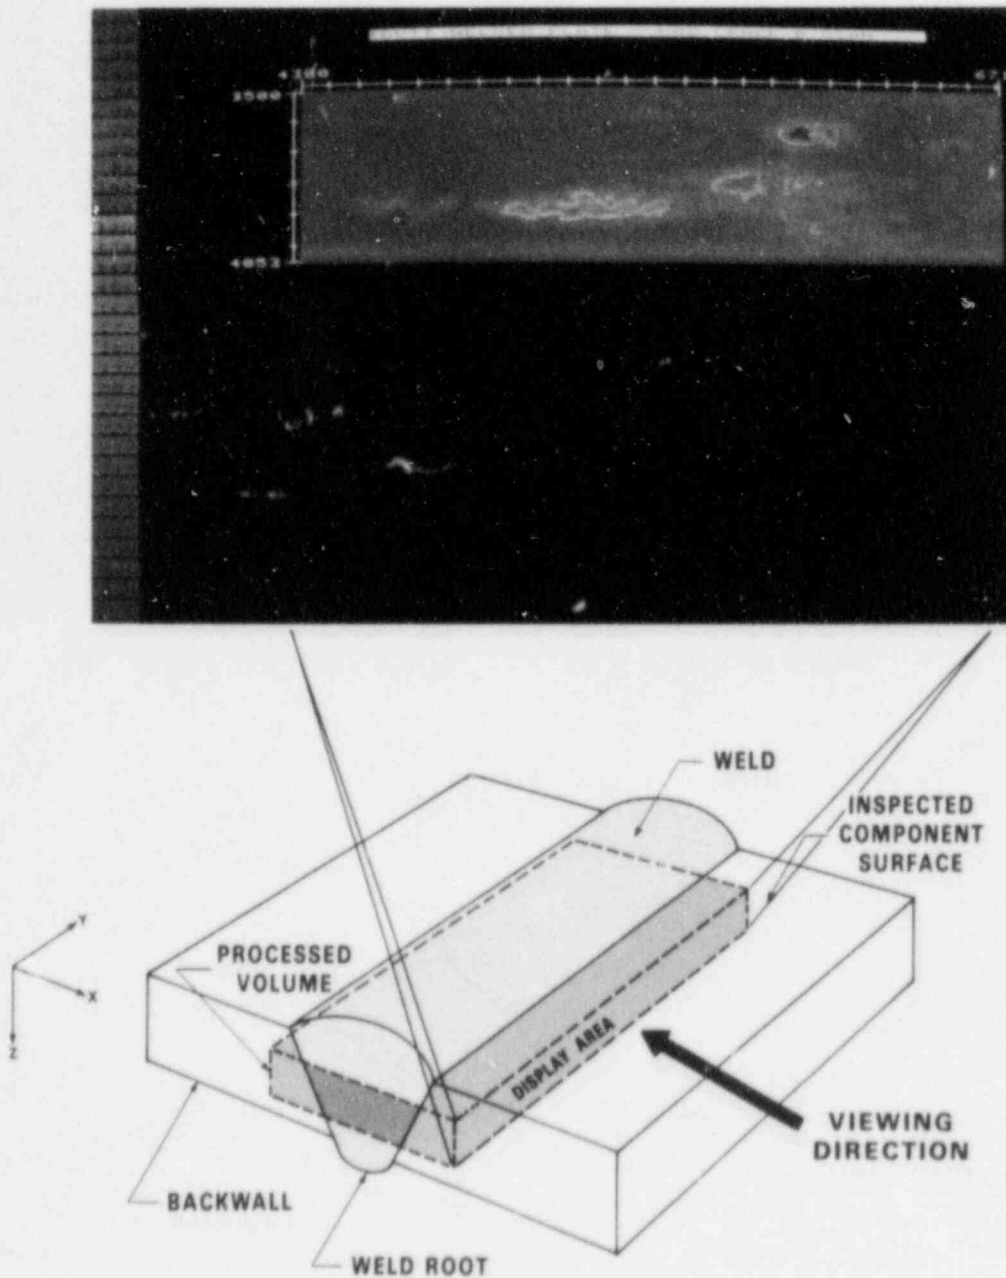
BUTT-WELDED CARBON STEEL PLATE SPECIMEN - WELD CRACK/PITTING
